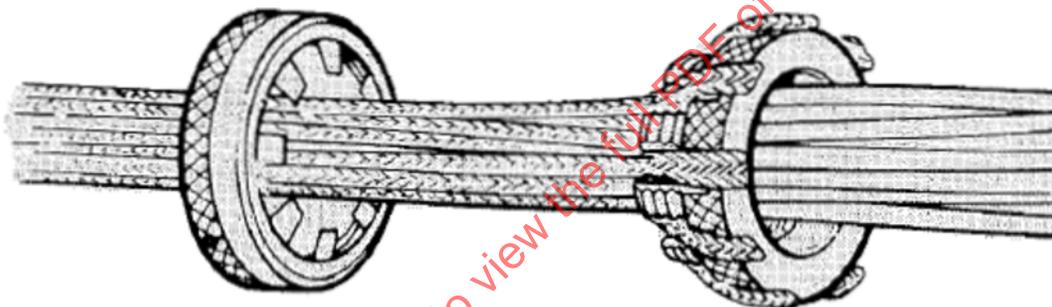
STEP 3 OF ASSEMBLY INSTRUCTIONS
